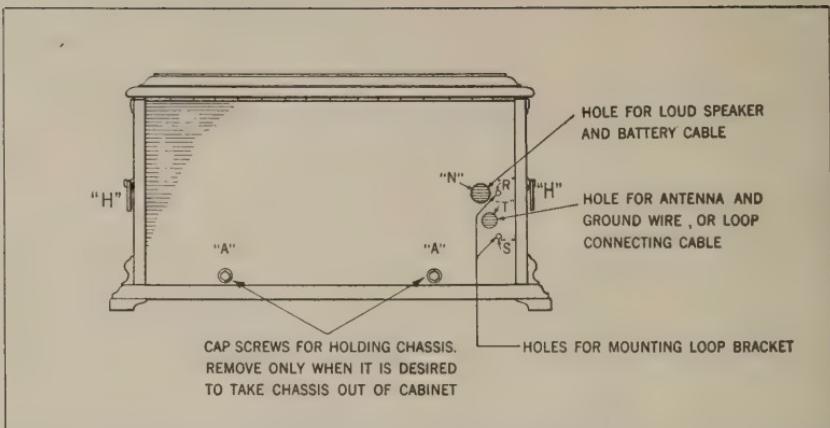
Rear of No. 601-B Cabinet, Showing Chassis Holding Cap Screws and Openings for external Circuit Wiring
